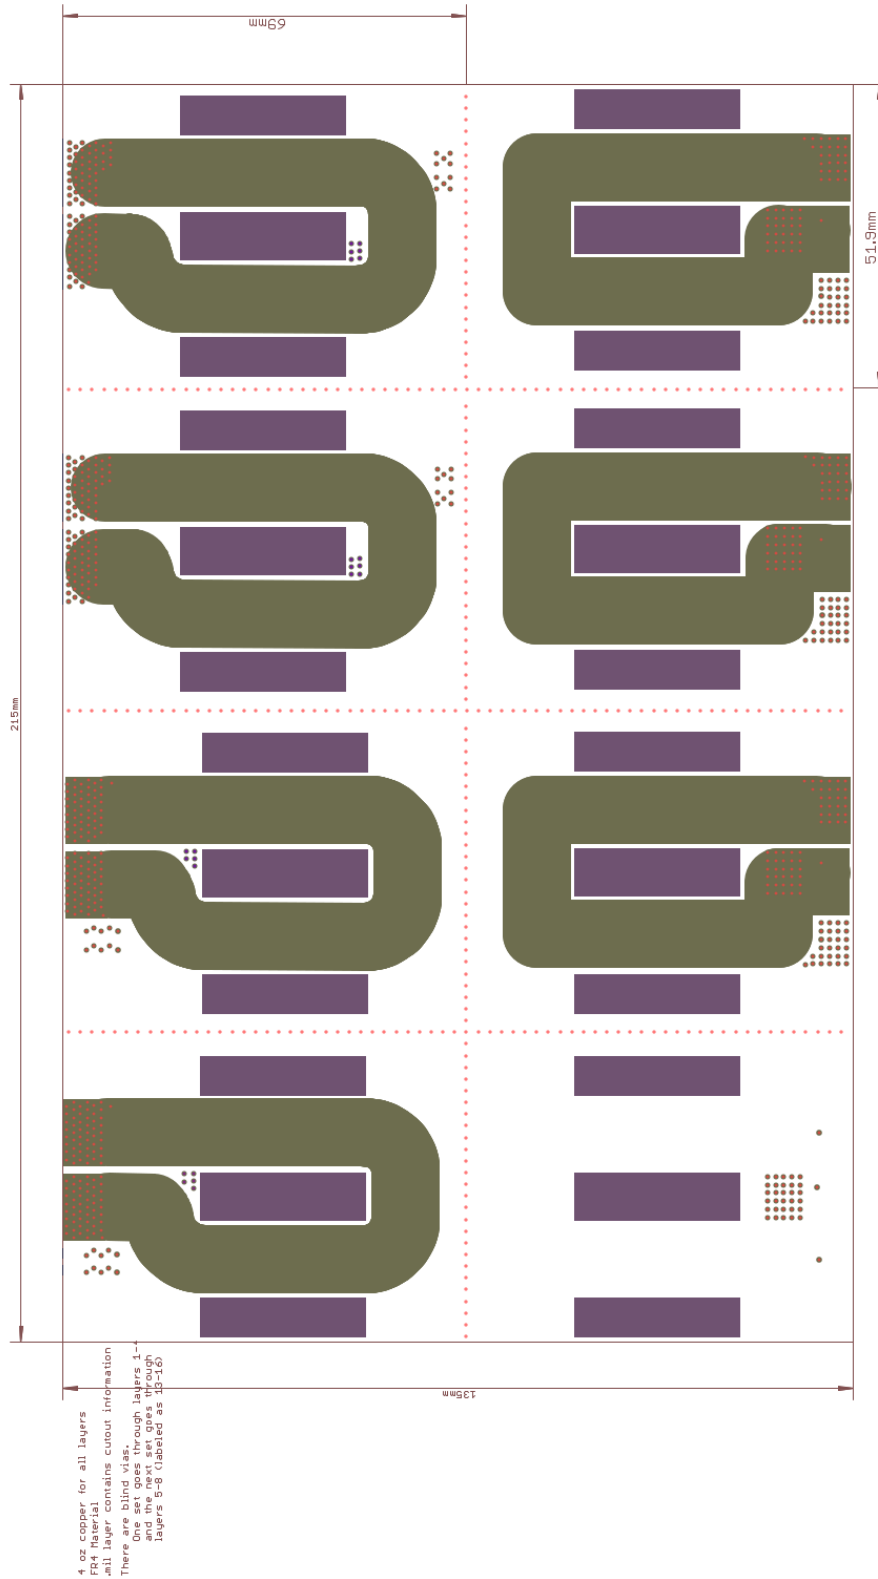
Layer 2 of the ICN transformer PCB winding (located in the top left) and other magnetic component variants. The purple rectangles indicate cutouts in the board.
